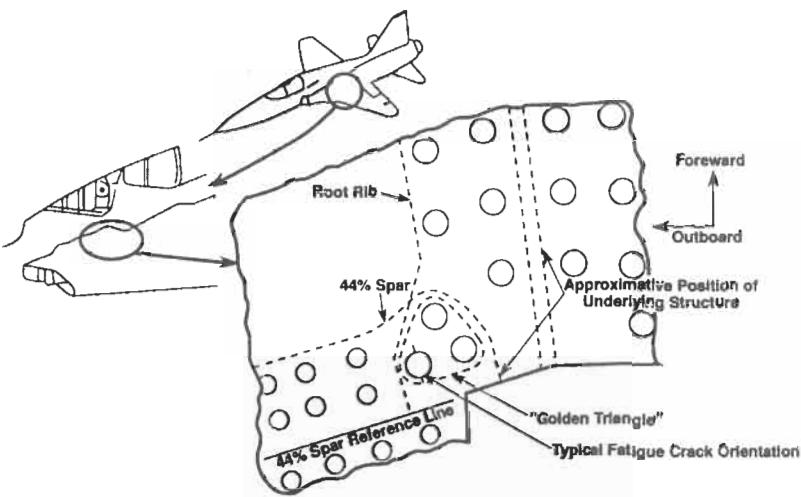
CF116 and location of upper wing skin fastener hole cracks.
